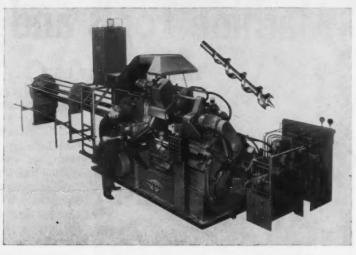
Greenlee automatic miller produces solid-center auger bits
